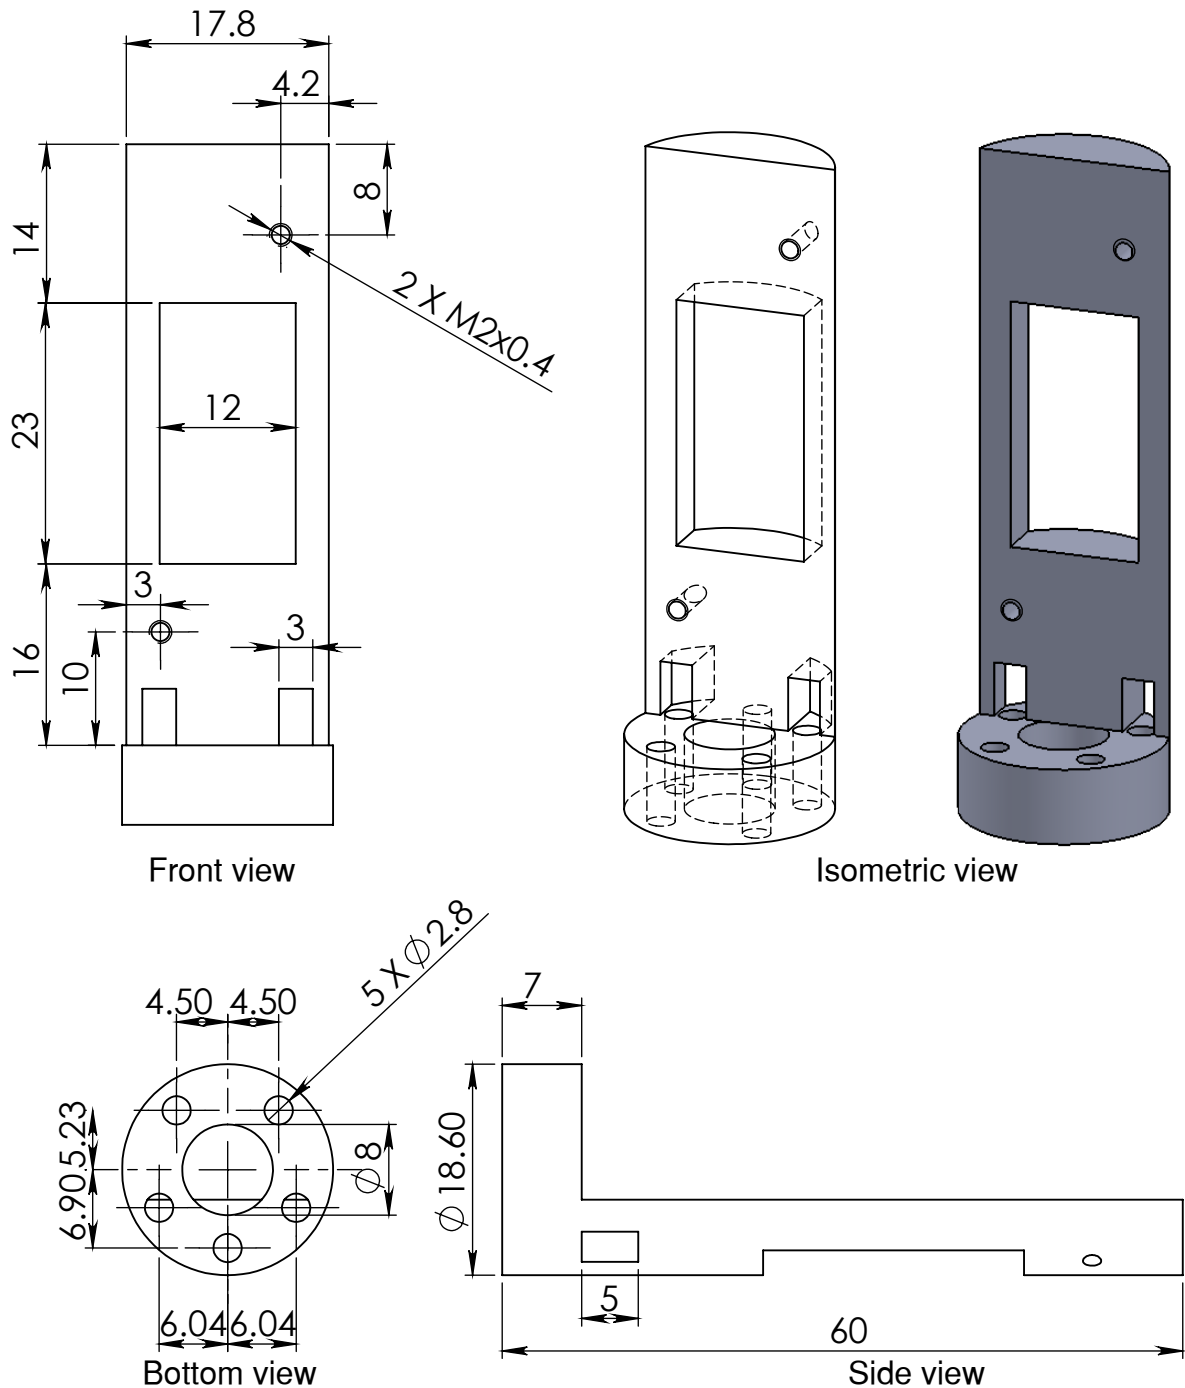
Technical working drawing of the 3D printed probe head holder. The insert was printed using an Ultimaker 2⁺ printer out of polylactic acid (PLA). All dimensions are in mm, and the figure scale is 1.5:1.
